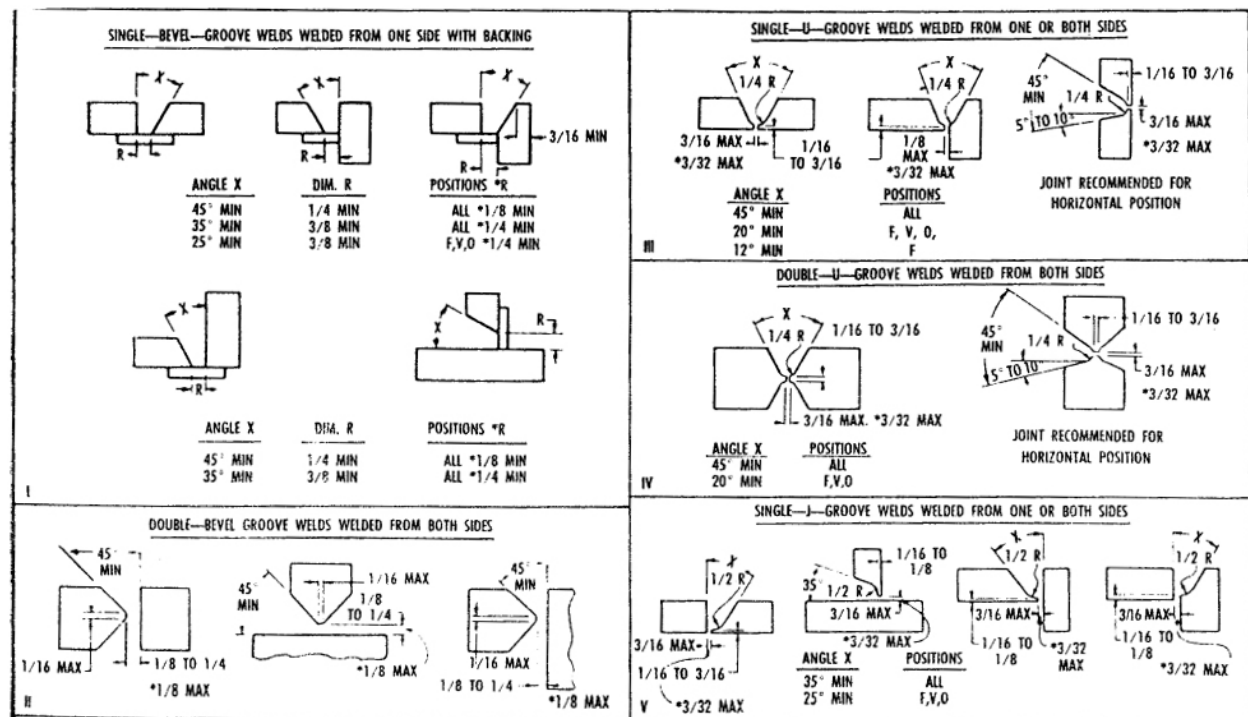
Recommended proportions of grooves for shielded metal-arc, gas tungsten-arc, gas metal-arc, flux-cored arc, and gas welding (except pressure gas welding). Note: Dimensions marked * are exceptions that apply specifically to designs for gas metal-arc welding. [59]
